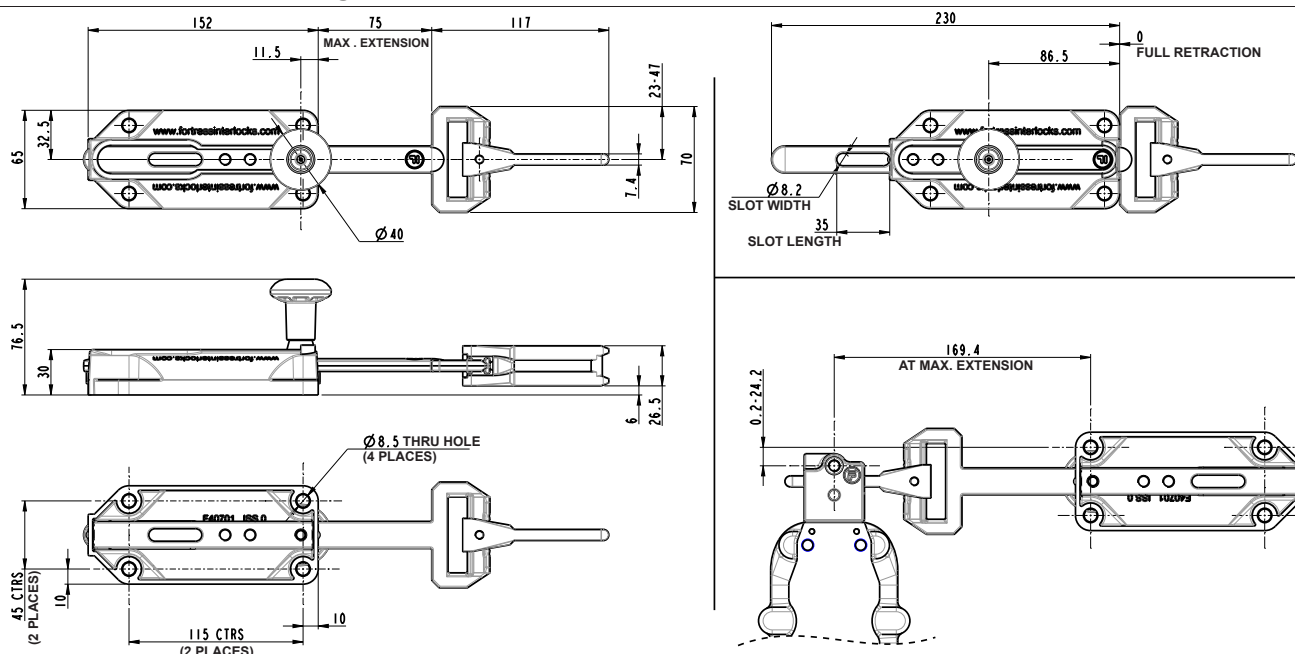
Dimensional Drawing – EXPTN and EXPTS Slidebar Actuator
